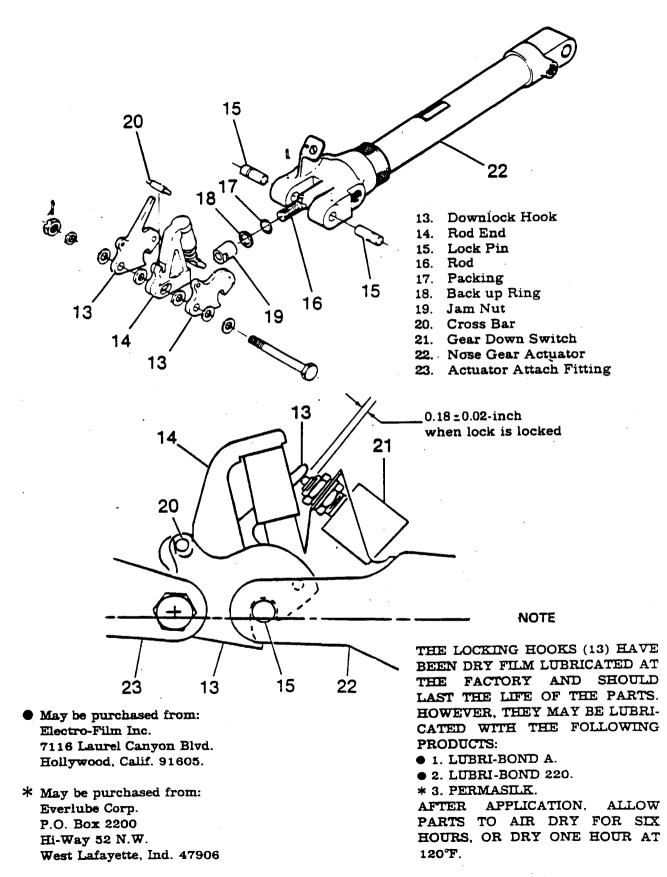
Nose Gear Rigging (Sheet 2 of 2)
